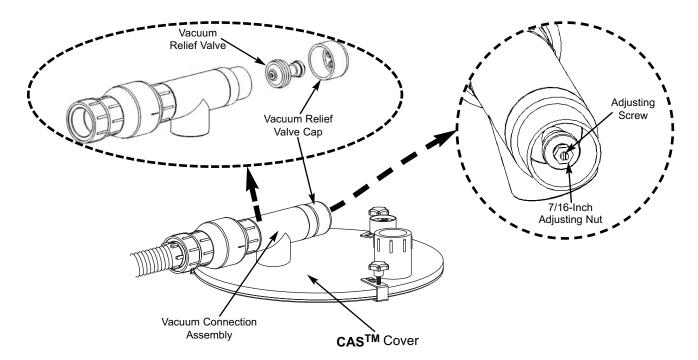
Vacuum Relief Valve Adjustment and Cleaning Detail
